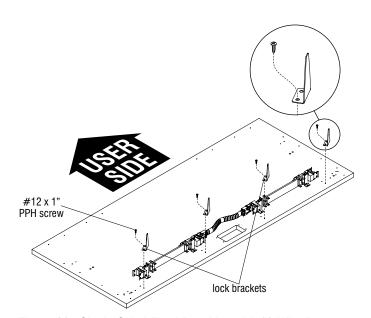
Single-Sided Fixed Benching with 10-Wire Power & No Modesty Panels
